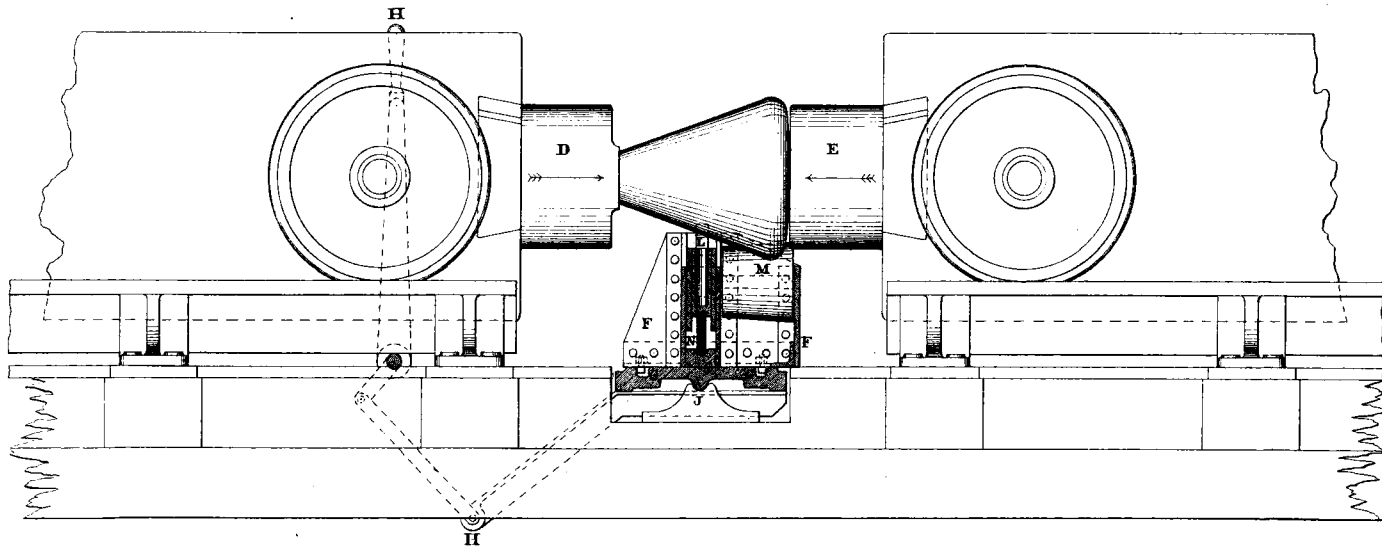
Side Elevation of Horizontal Duplex Hammer, hammering Bloom laterally.
